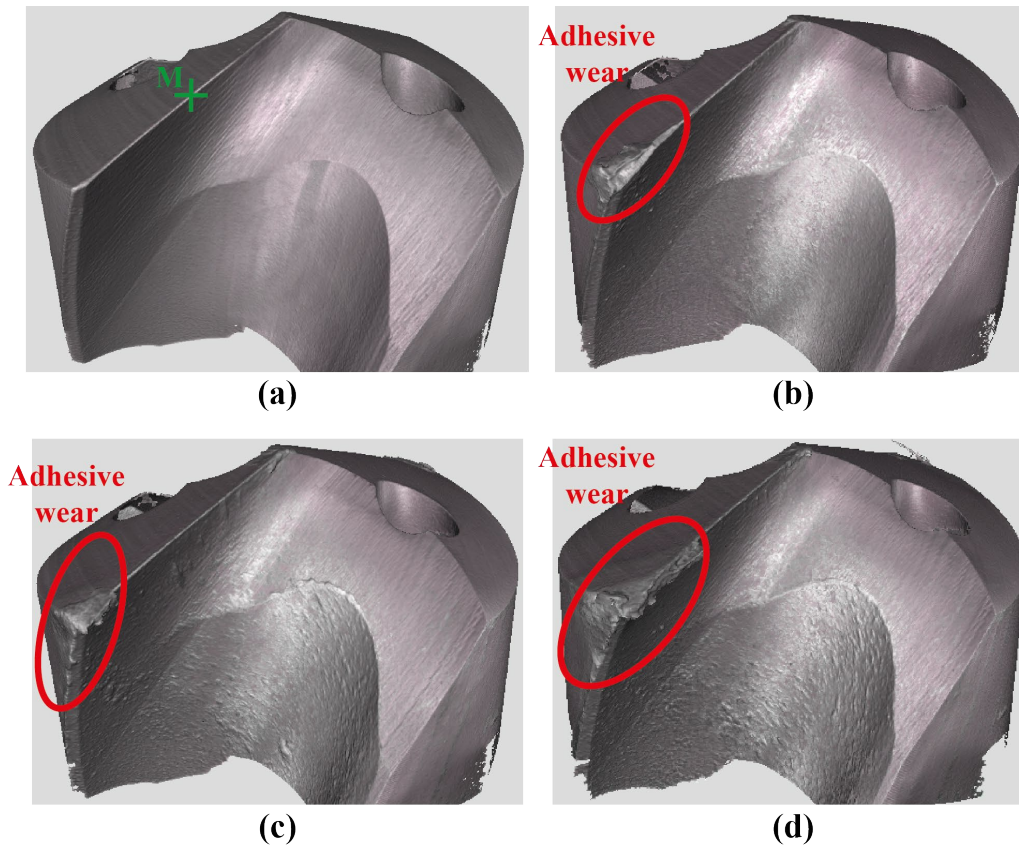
Top view of the tool at wear level 1 (a), 2 (b), 3 (c) and 4 (d)
